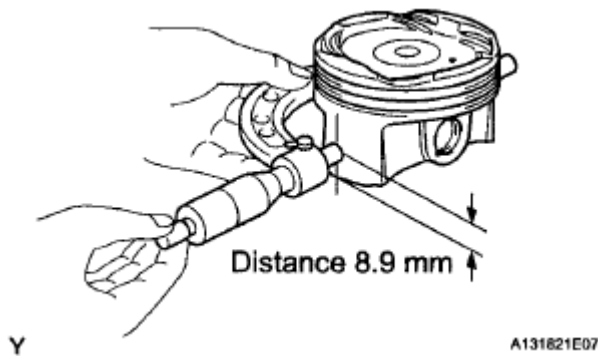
Measuring Piston Diameter Right Angles To Piston Center Line
